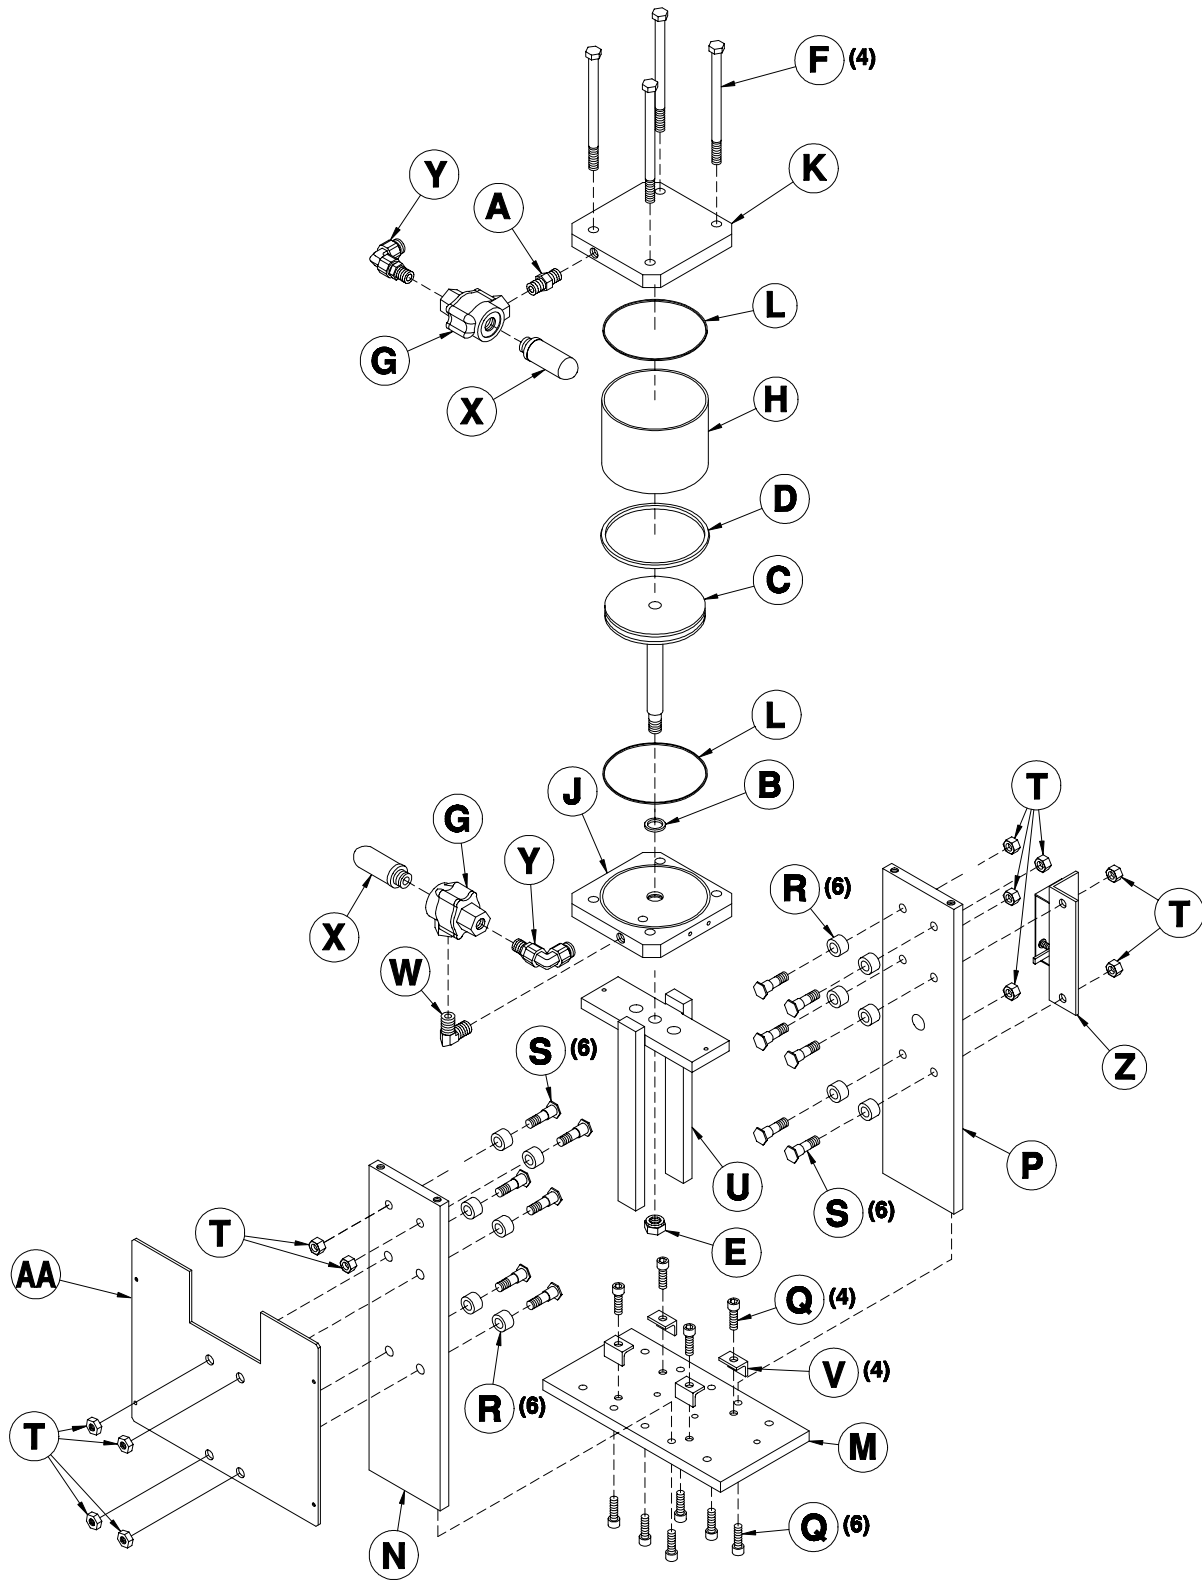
10:1 Air Motor (Part No. 57796), Exploded View
